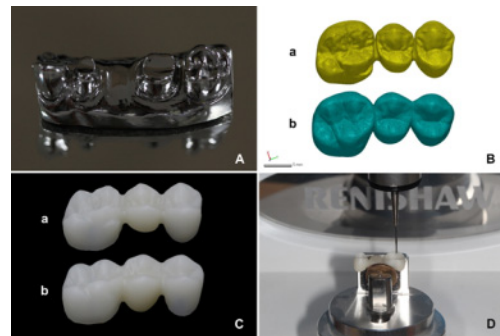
Three-unit fixed dental prosthesis fabricated using two milling machines.
